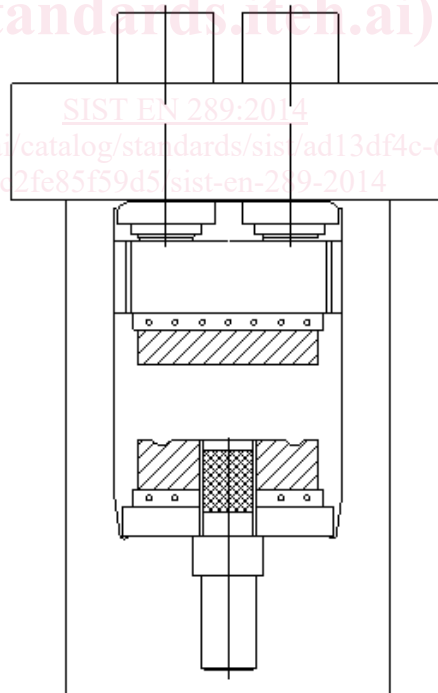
Press for transfer moulding shown with separate cylinder and with moulding material in transfer cavity
